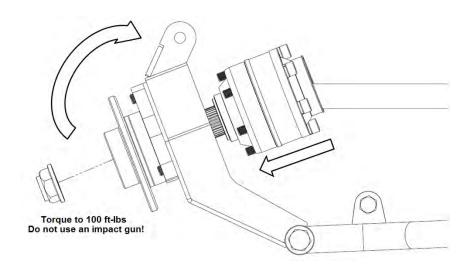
Tilt the shaft downwards, and rotate the upright upwards to slide the spline through the bearing.
